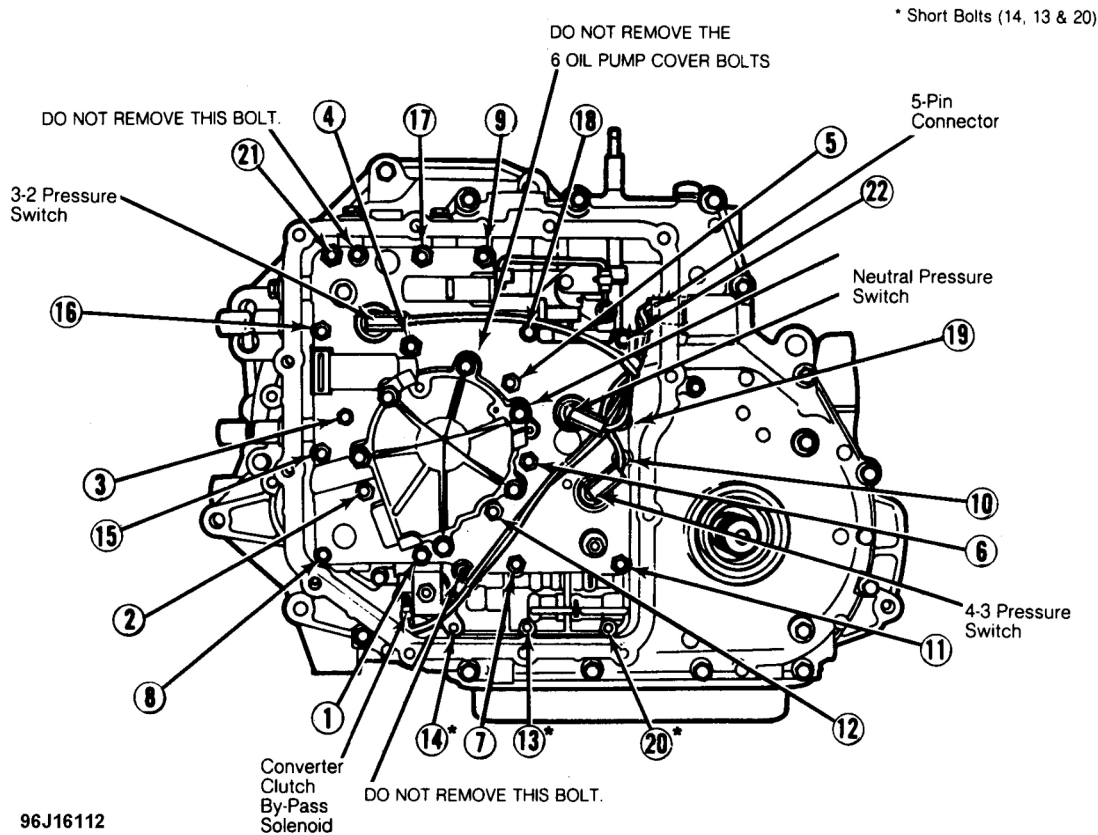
Oil Pump & Valve Body Bolt Removal & Installation
